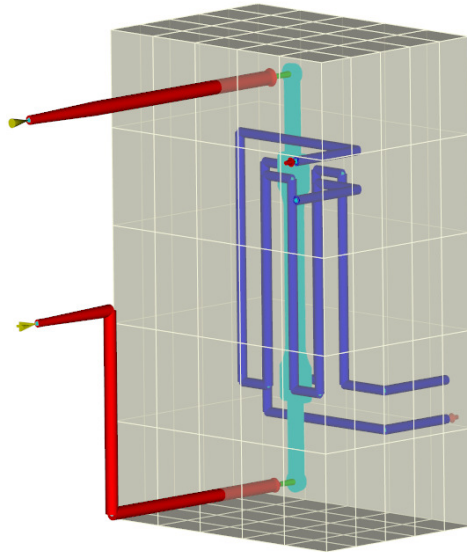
CAD geometry of specimens in Moldflow® with (right) and without (left) sprues
